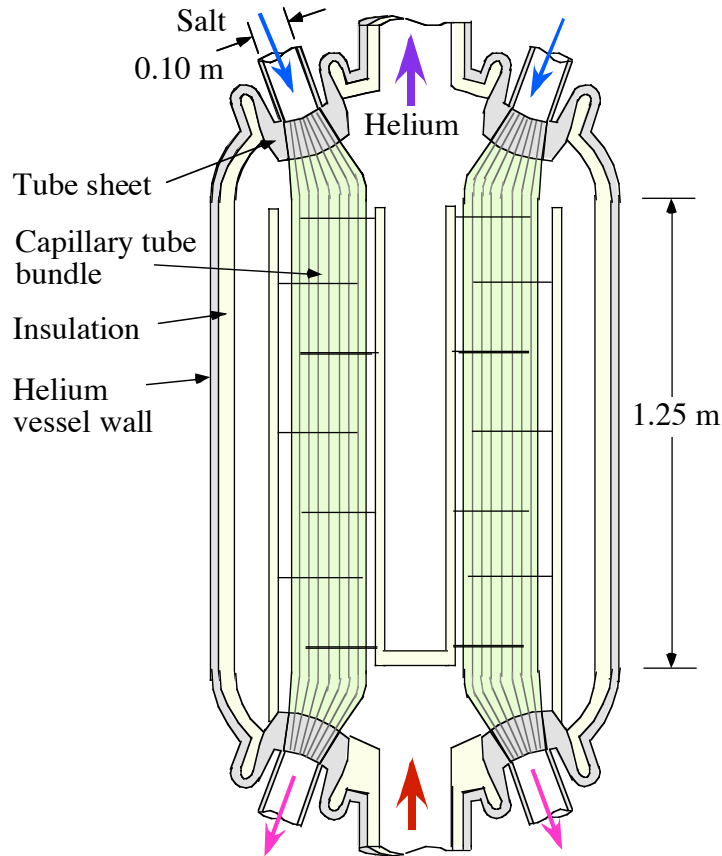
Capillary tube and shell heat exchanger showing the proposed tube-bundle geometry formed by diffusion bonding of multiple bundles of ~2,500 3.0-mm diameter tubes with hexagonally tapered ends to form inlet and outlet tube sheets (Fig. 2).
